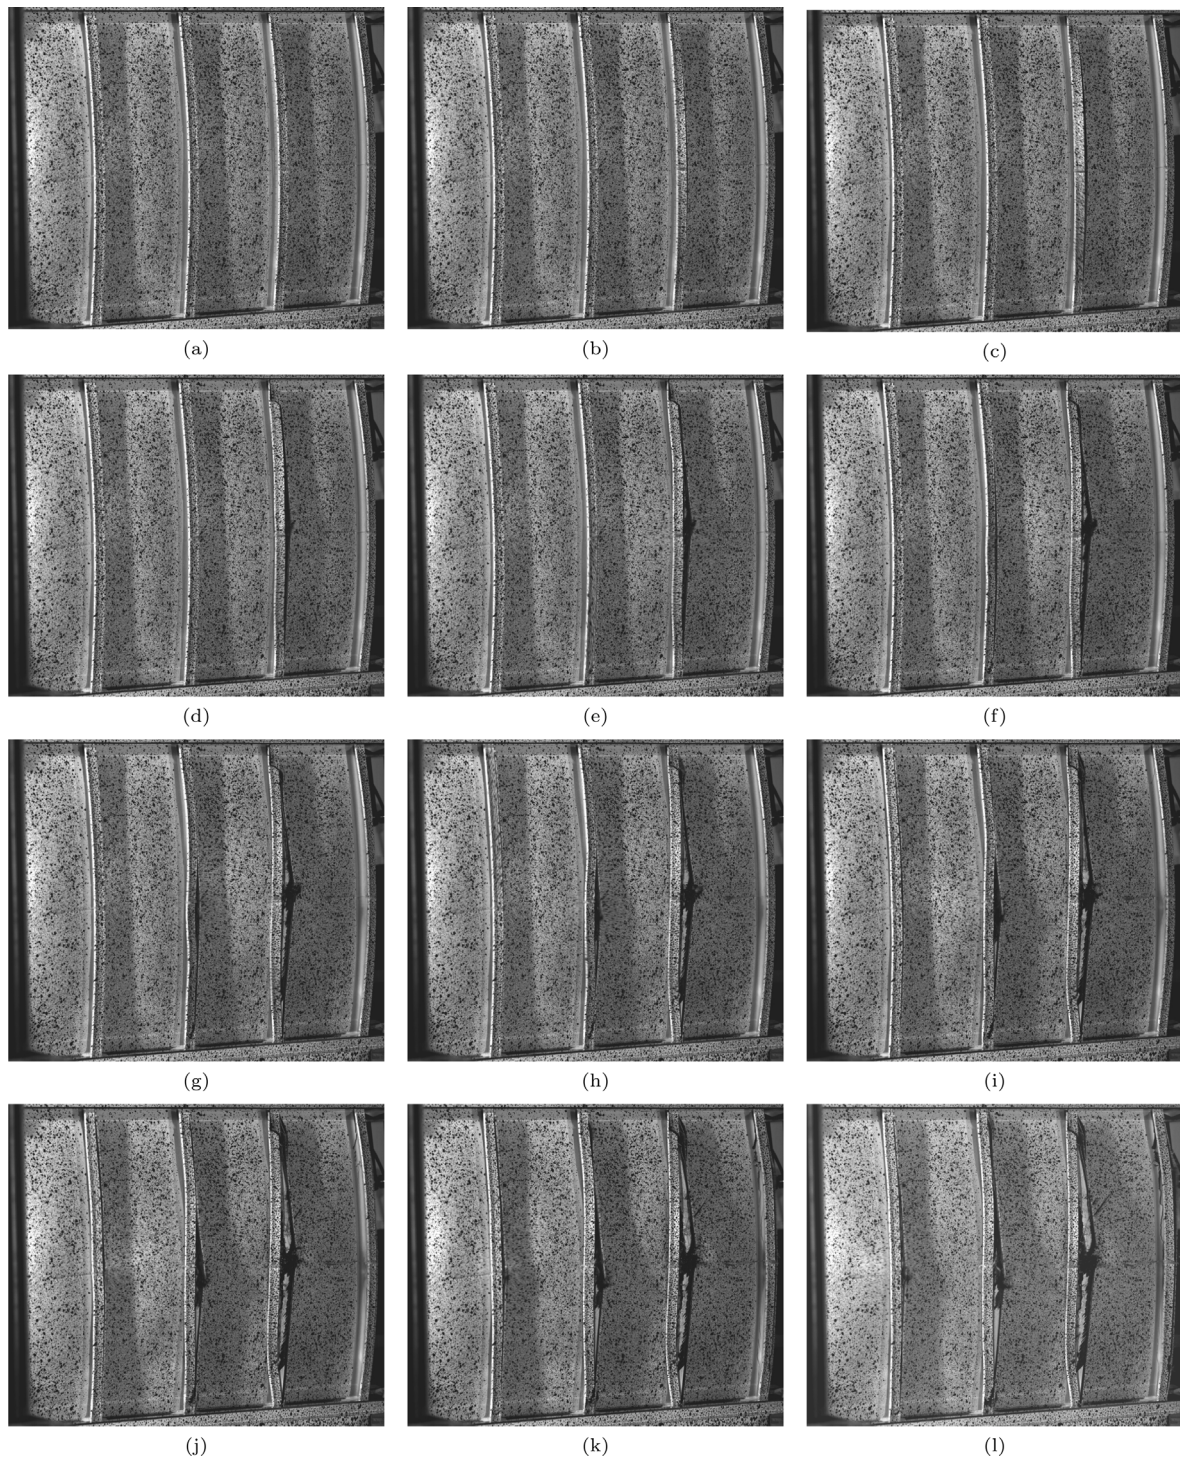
High-speed footage panel 1: (a–b–c) stringer 4 cap separation; (d) stringer 4 web fracture; (e–f) stringer 4 cap separation; (g) stringer 3 web fracture; (h) stringer 2 cap separation; (i) stringer 5 butt-joint failure; (j–k) stringer 2 web fracture, stringer 5 cap separation; (l) stringer 5 web failure.
